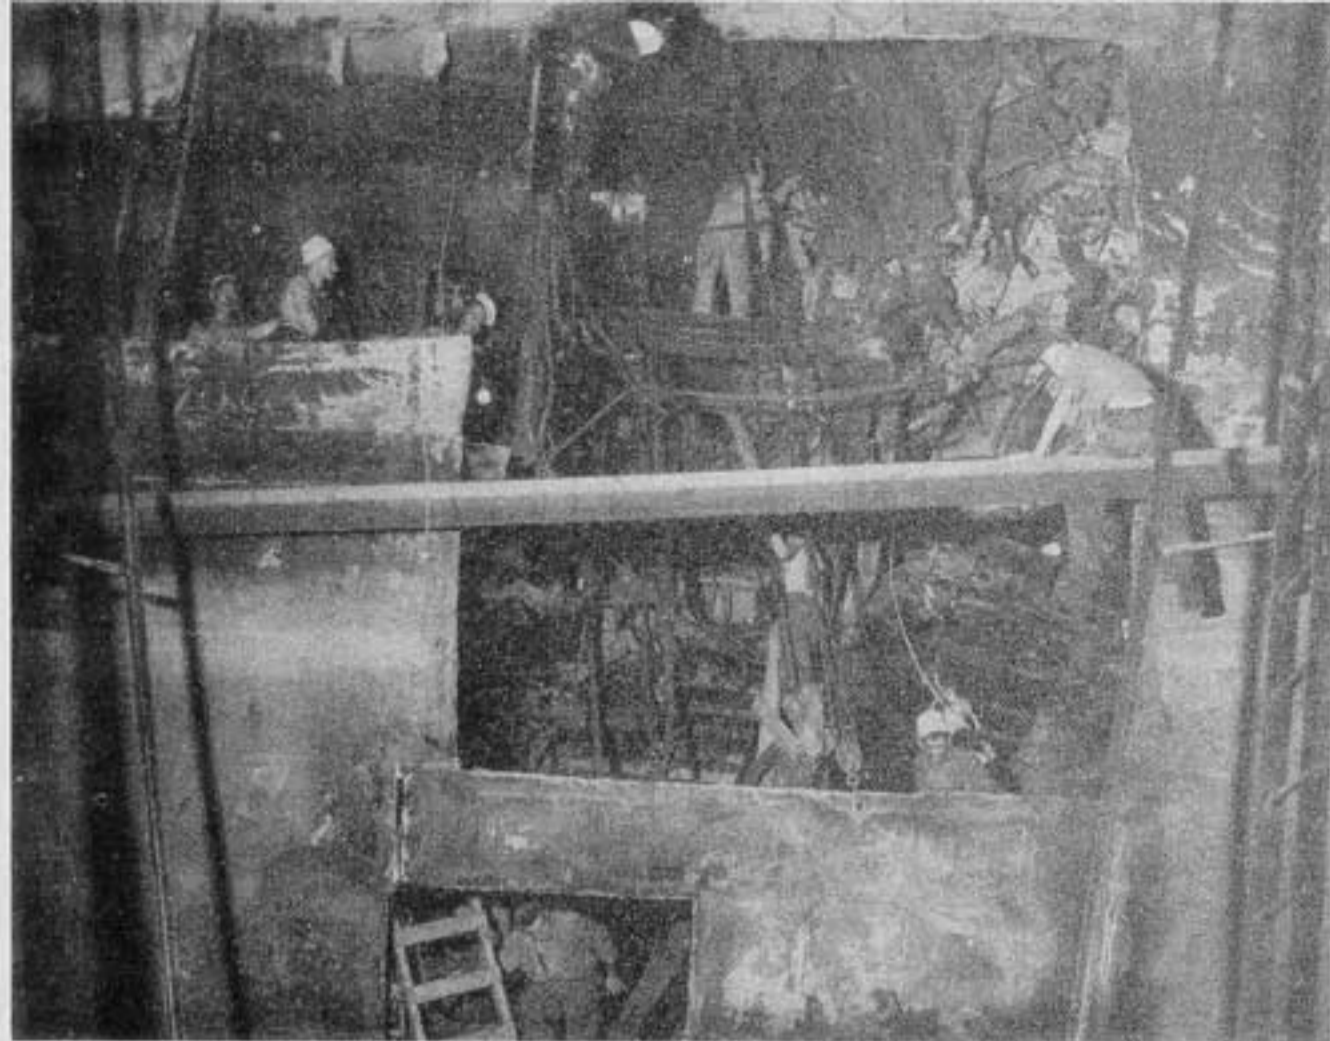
KILLEN (DD593). Looking up into damaged area from dock floor in ABSD2 after damaged shell plating was cut away, port side.
